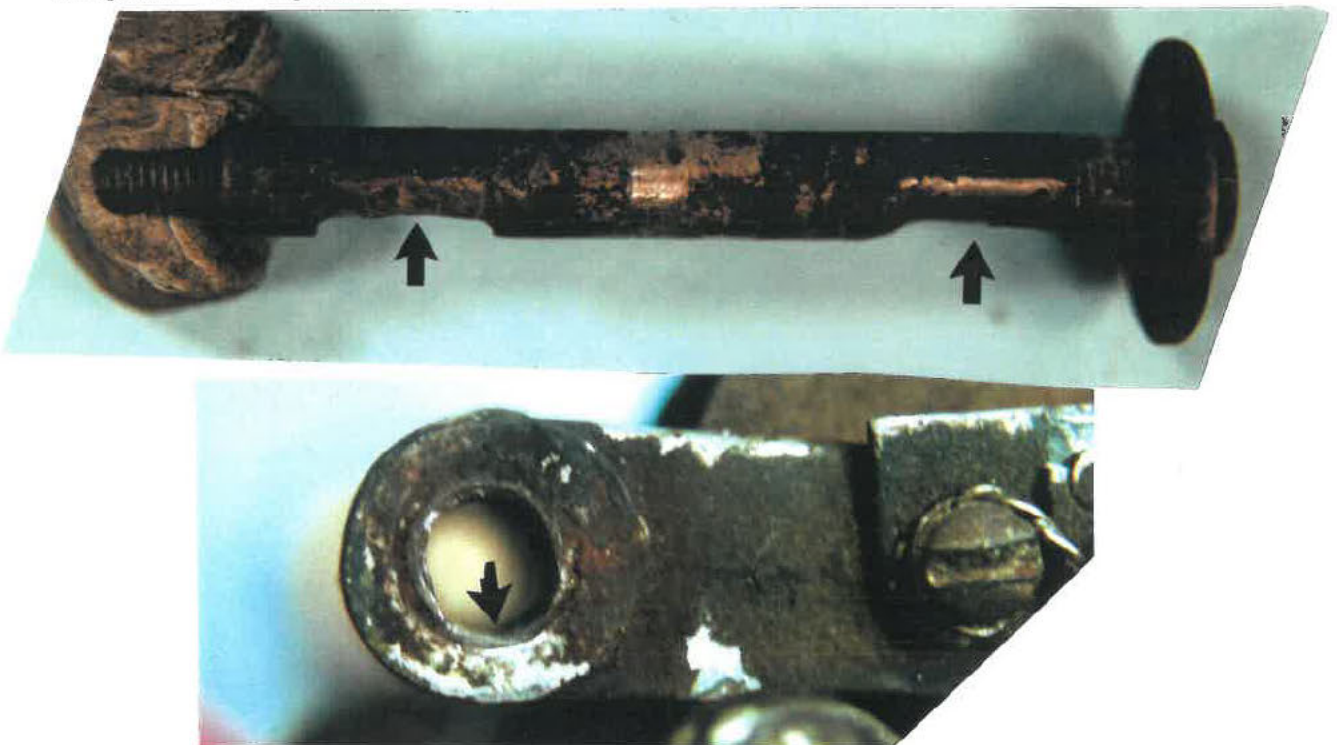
The worn out sleeve and elongated holes in the pulley assembly arm.
